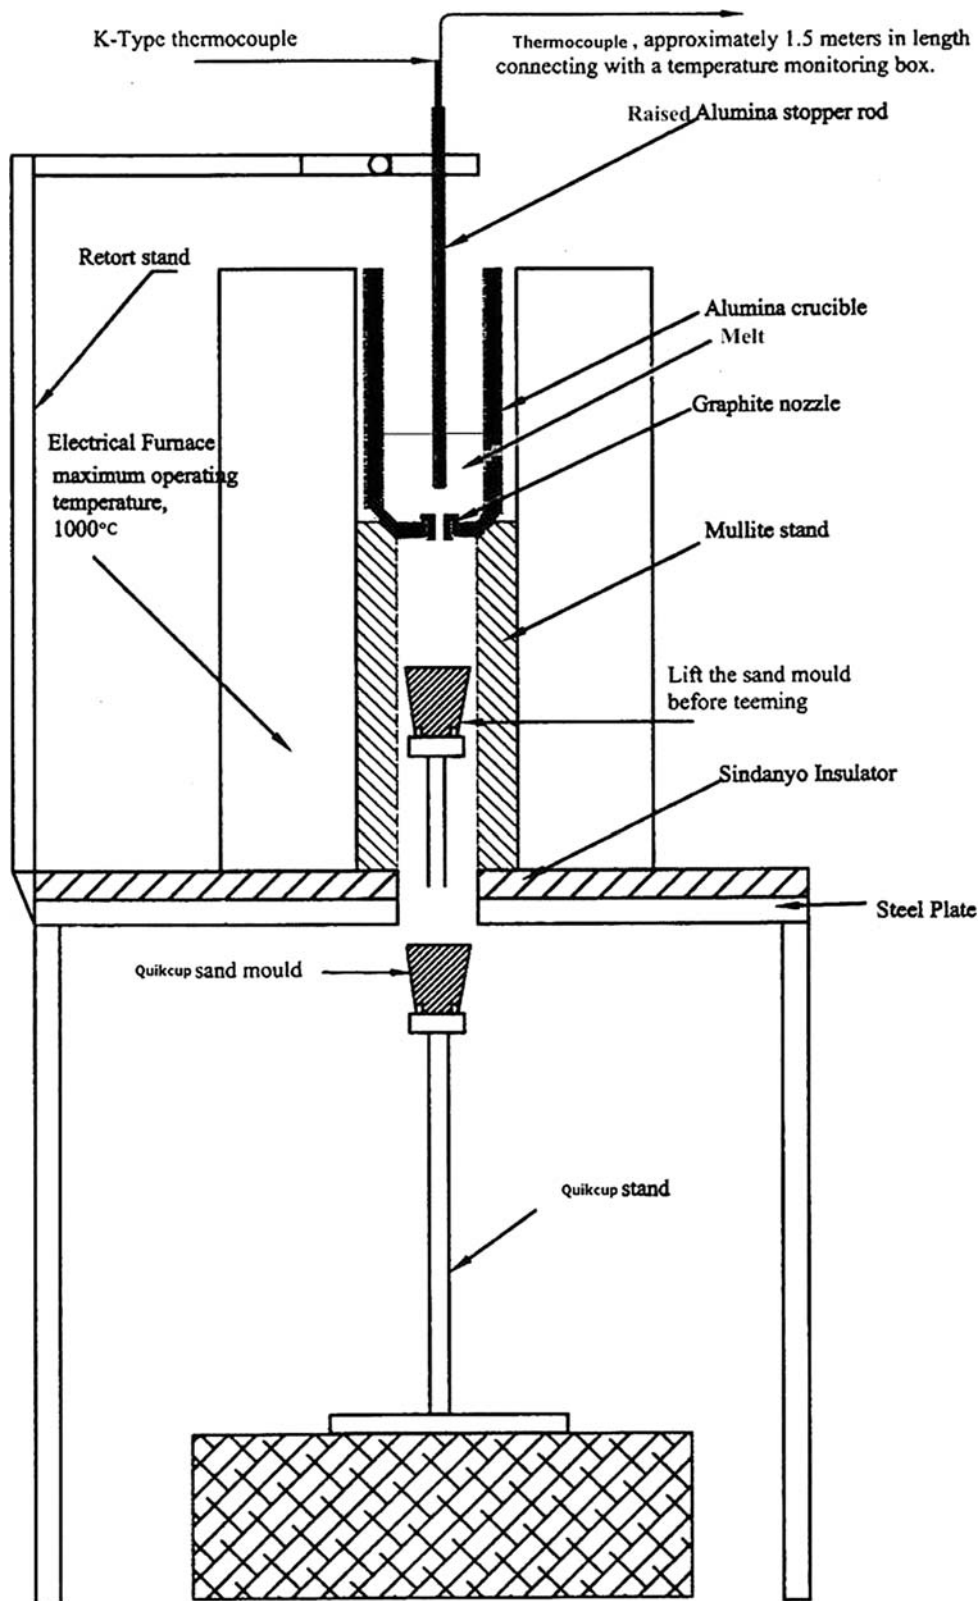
Apparatus for bottom casting into a bonded sand mold.
